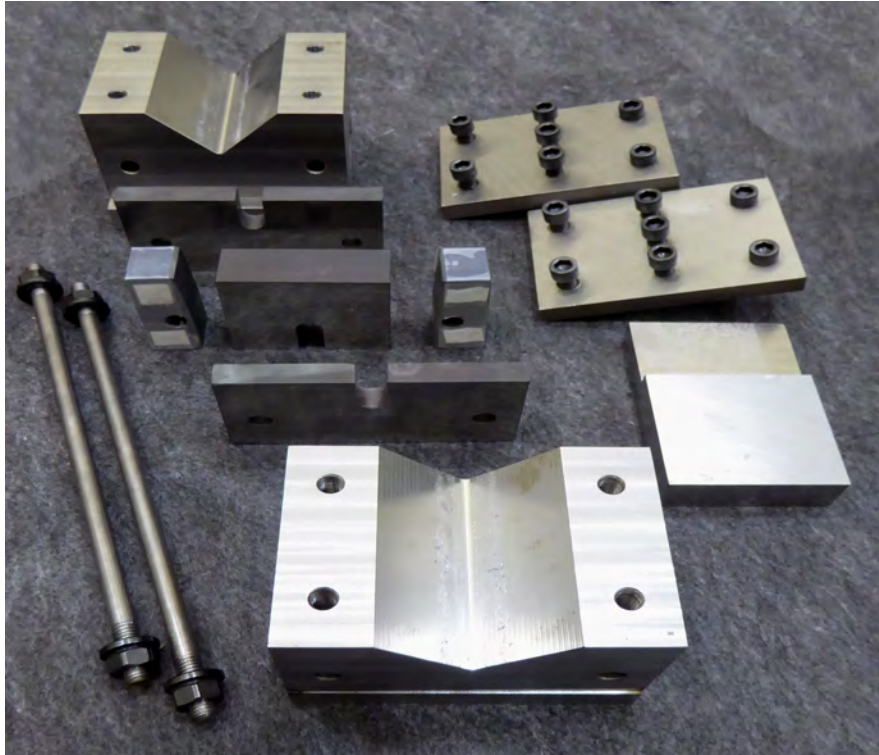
Transverse shear fixture — Main body of fixture disassembled
